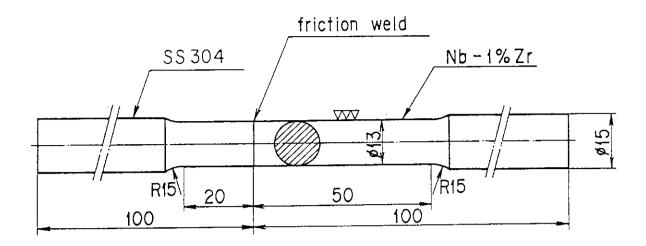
Rodlike specimen of tensile test at 293K(Type A).
